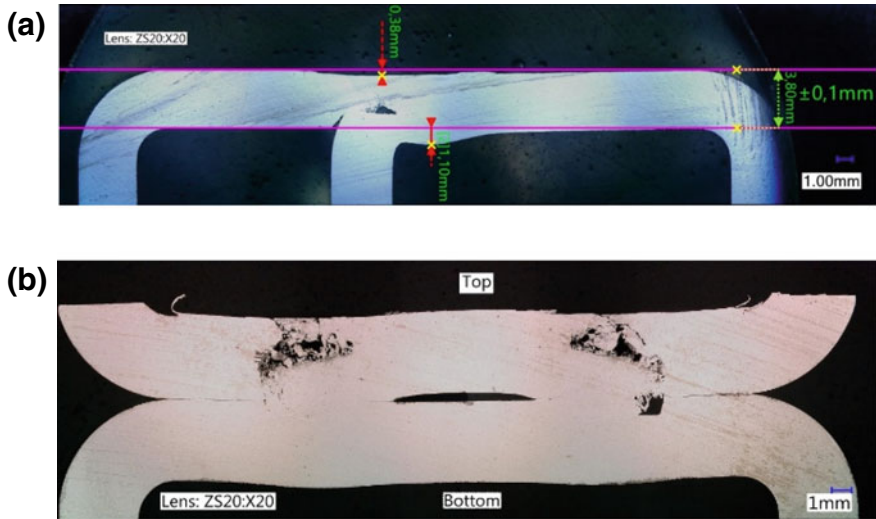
Defects and deformation in FSW ME21-ME21 joints: a butt joint in modified generic profile joining lid and corner, b lap joint of generic profile lids
